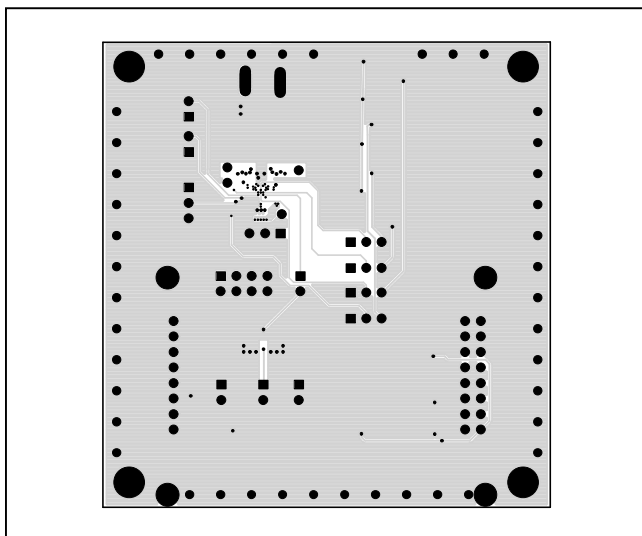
MAX77387 EV Kit PCB Layout—Inner Layer 2
